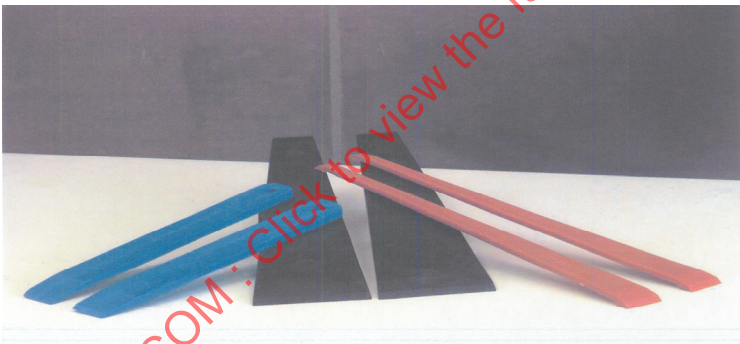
COMMONLY APPROVED HAND TOOLS
